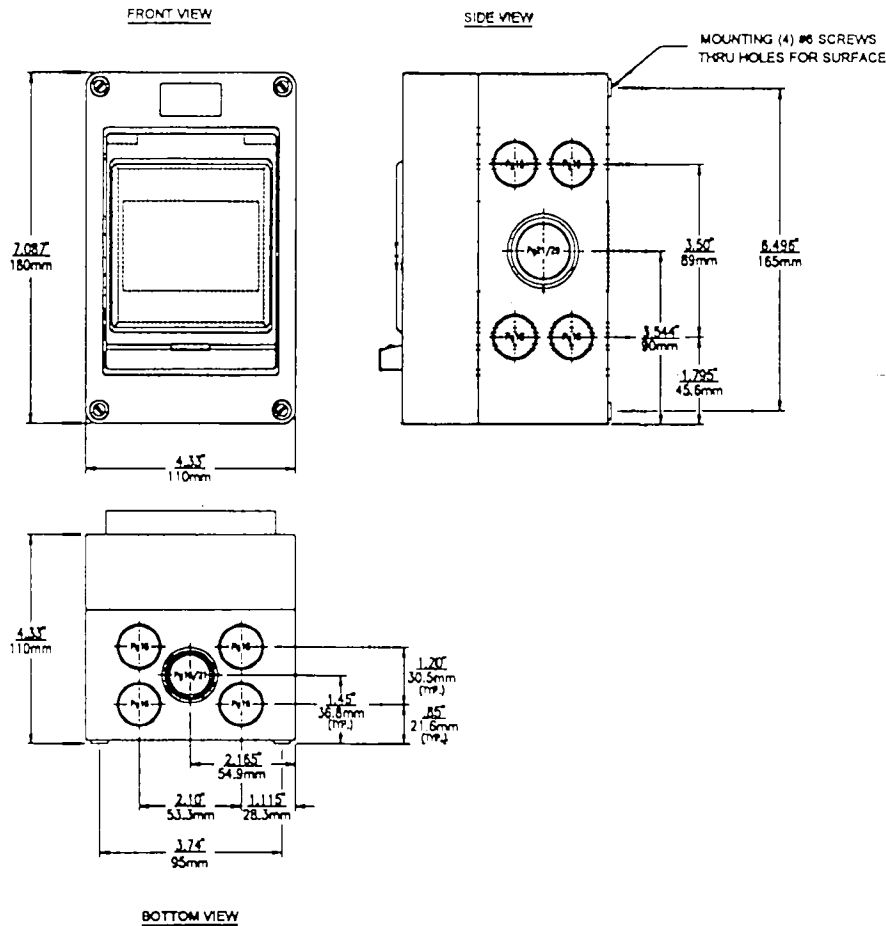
Single Module System Enclosure Dimensions (80-0005R, Rev-A)
